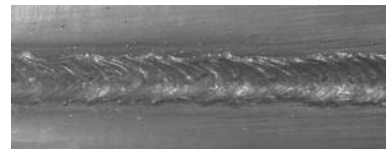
Hybrid welding of vertical position with V groove
